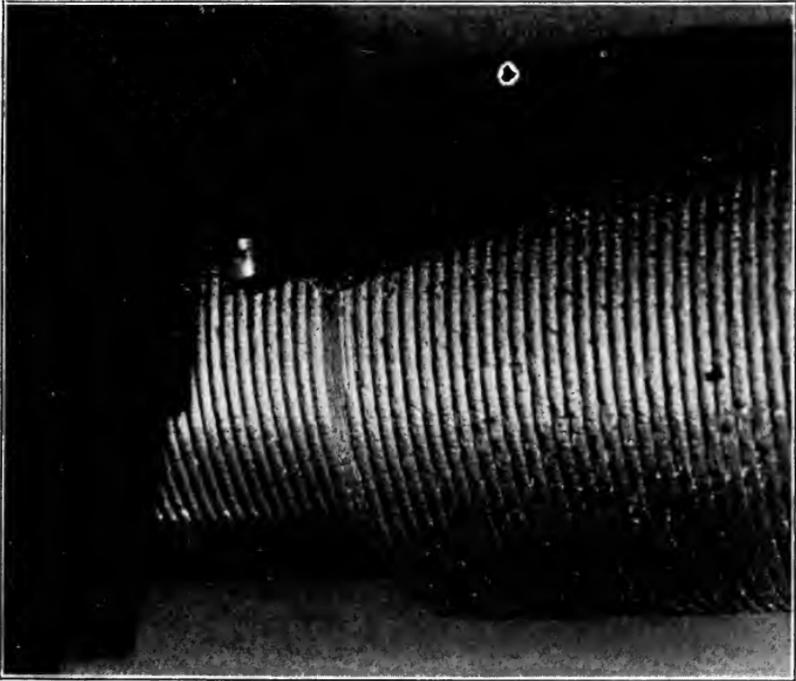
Roughing-Out for Grinding Showing Heavy Cut
